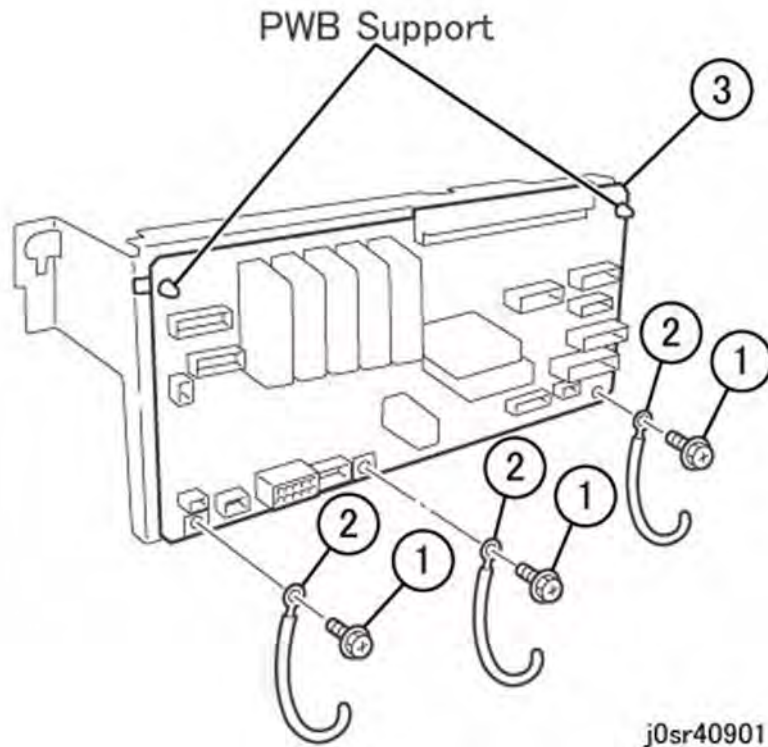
Removing the I/F (MDD) PWB from the Bracket Assembly
